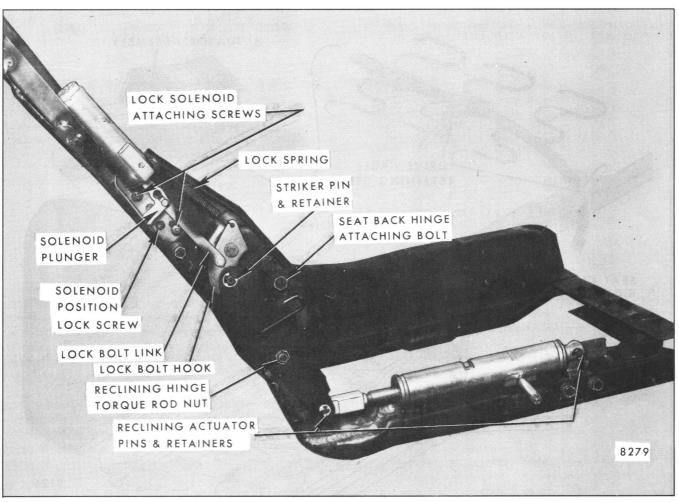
Passenger 50-50 Front Seat Reclining Back, Seat Back Lock and Reclining Actuator - Cadillac Eldorado
